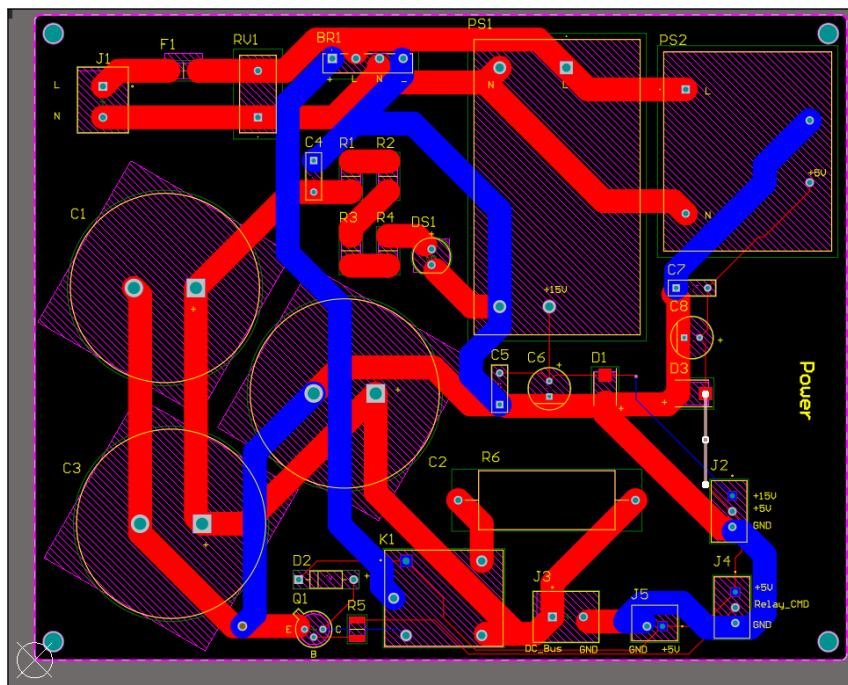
Power Circuit Bottom Layer PCB 2D Layout
